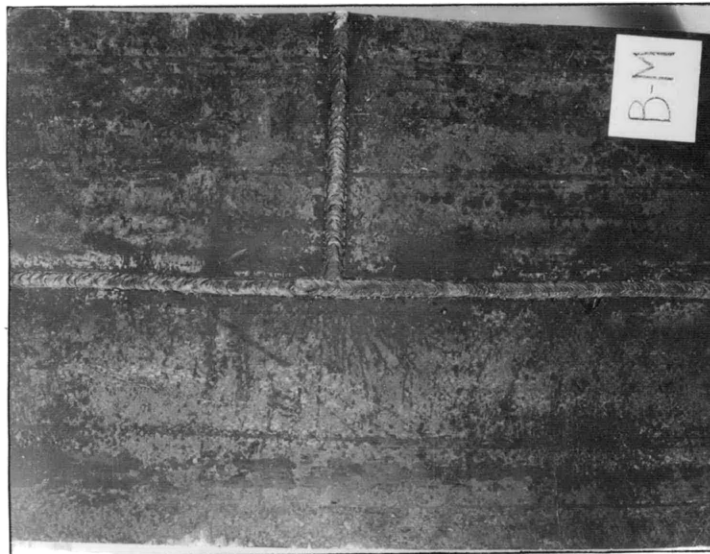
Medium Steel Specimen B-M at Half Transverse Butt after Test
